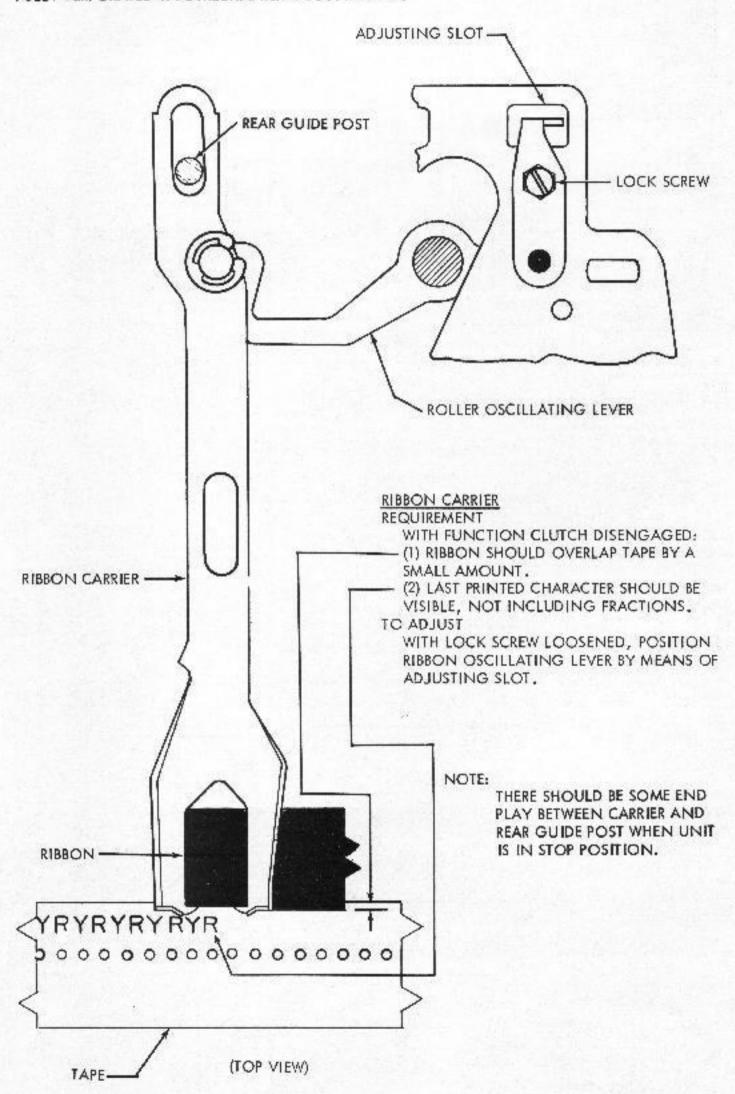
RIBBON OSCILLATING MECHANISM FOR CHADLESS TAPE
